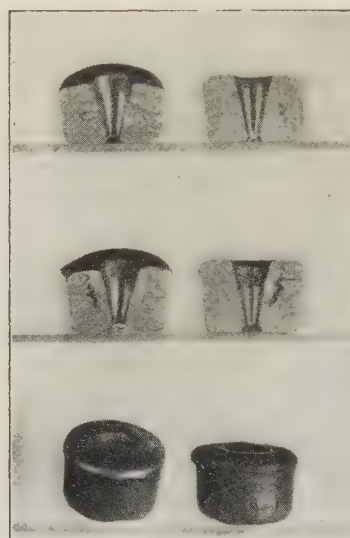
DIES USED FOR DRAWING LINE AND HEAVY-GAGE WIRE
